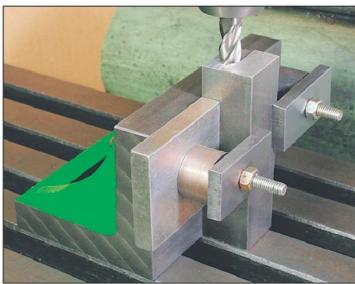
A compact clamping system, particularly useful on small angle plates and faceplates. The assembly also includes a fence to set the workpiece upright.
